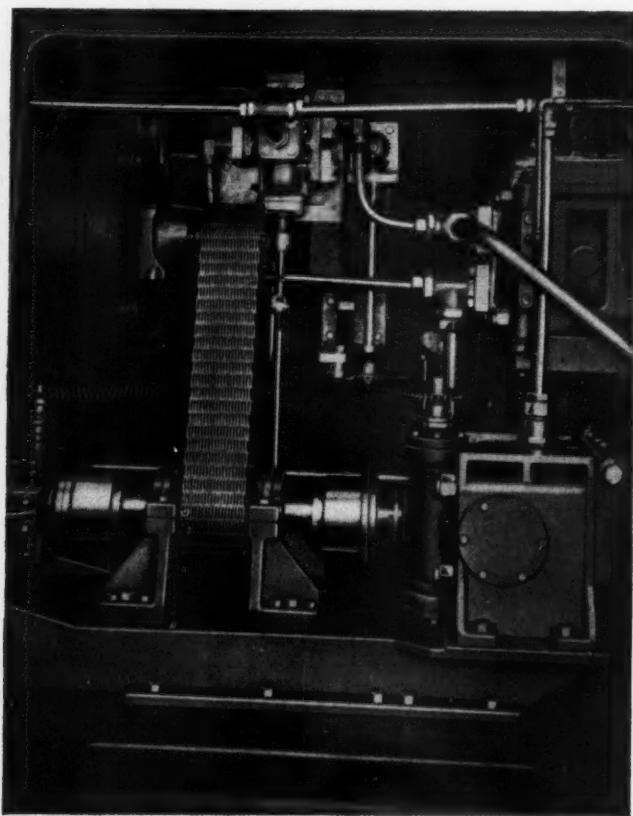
Variable-displacement pump built into the housing of a horizontal internal grinder is employed to provide adjustable-speed drives for spindle and feed
